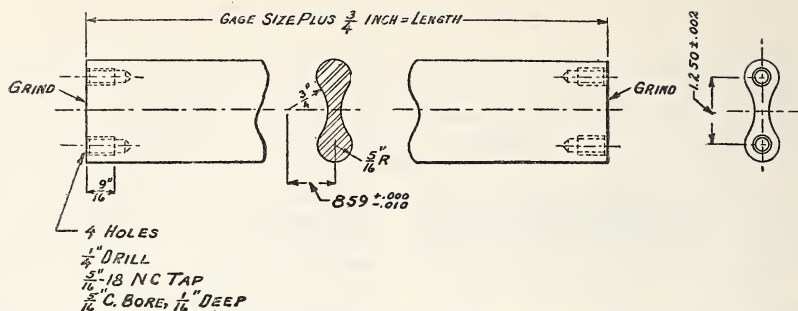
American Gage Design Standard adjustable length gage, detail of length gage spacing bar.
